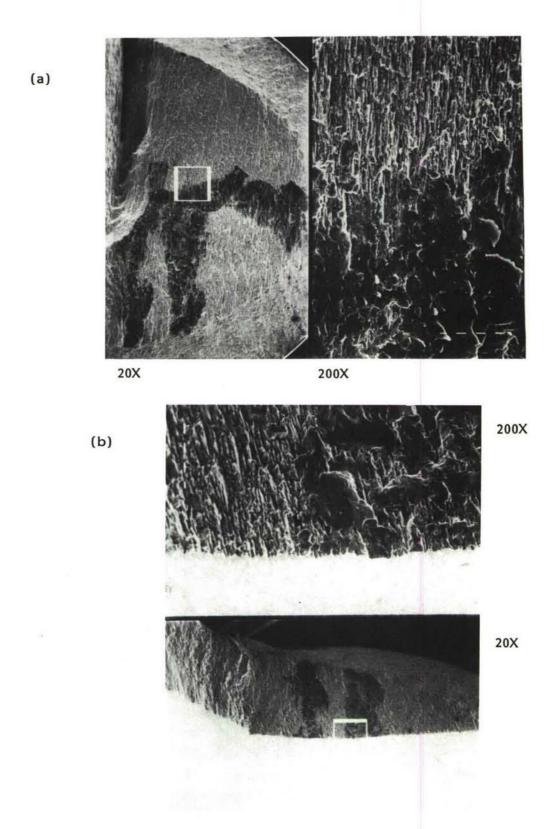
Precision sectioning of a short lived forging specimen tested at 60 ksi (415 MPa maximum cyclic stress).
